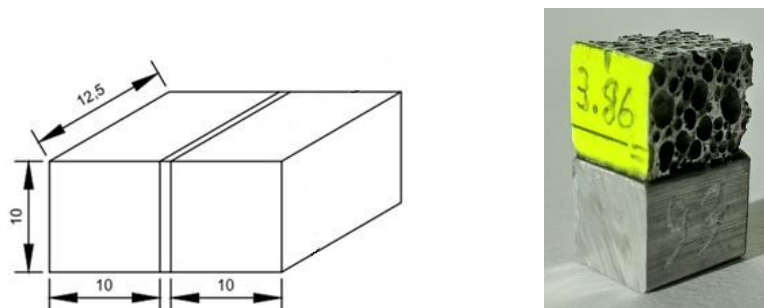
The dimensions of the bonded surfaces and the specimen (dimensions in mm).
